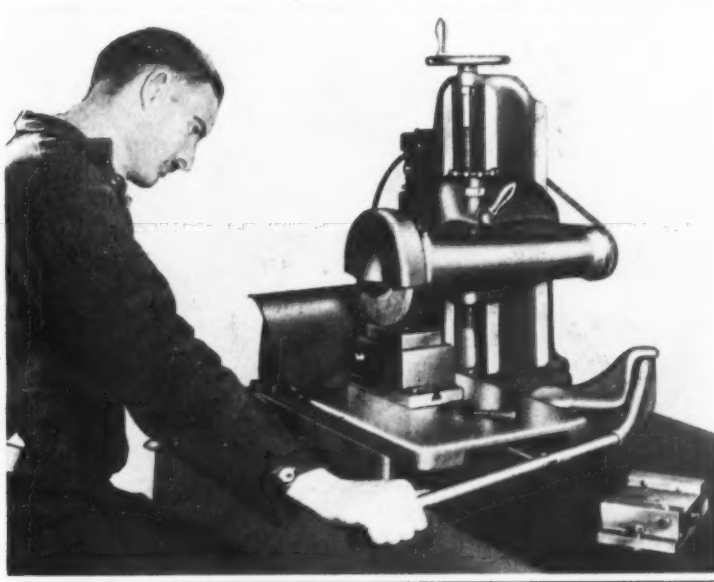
Reciprocating the Table of the Knee-action Surface Grinder on the Plane Surface of the Bed
